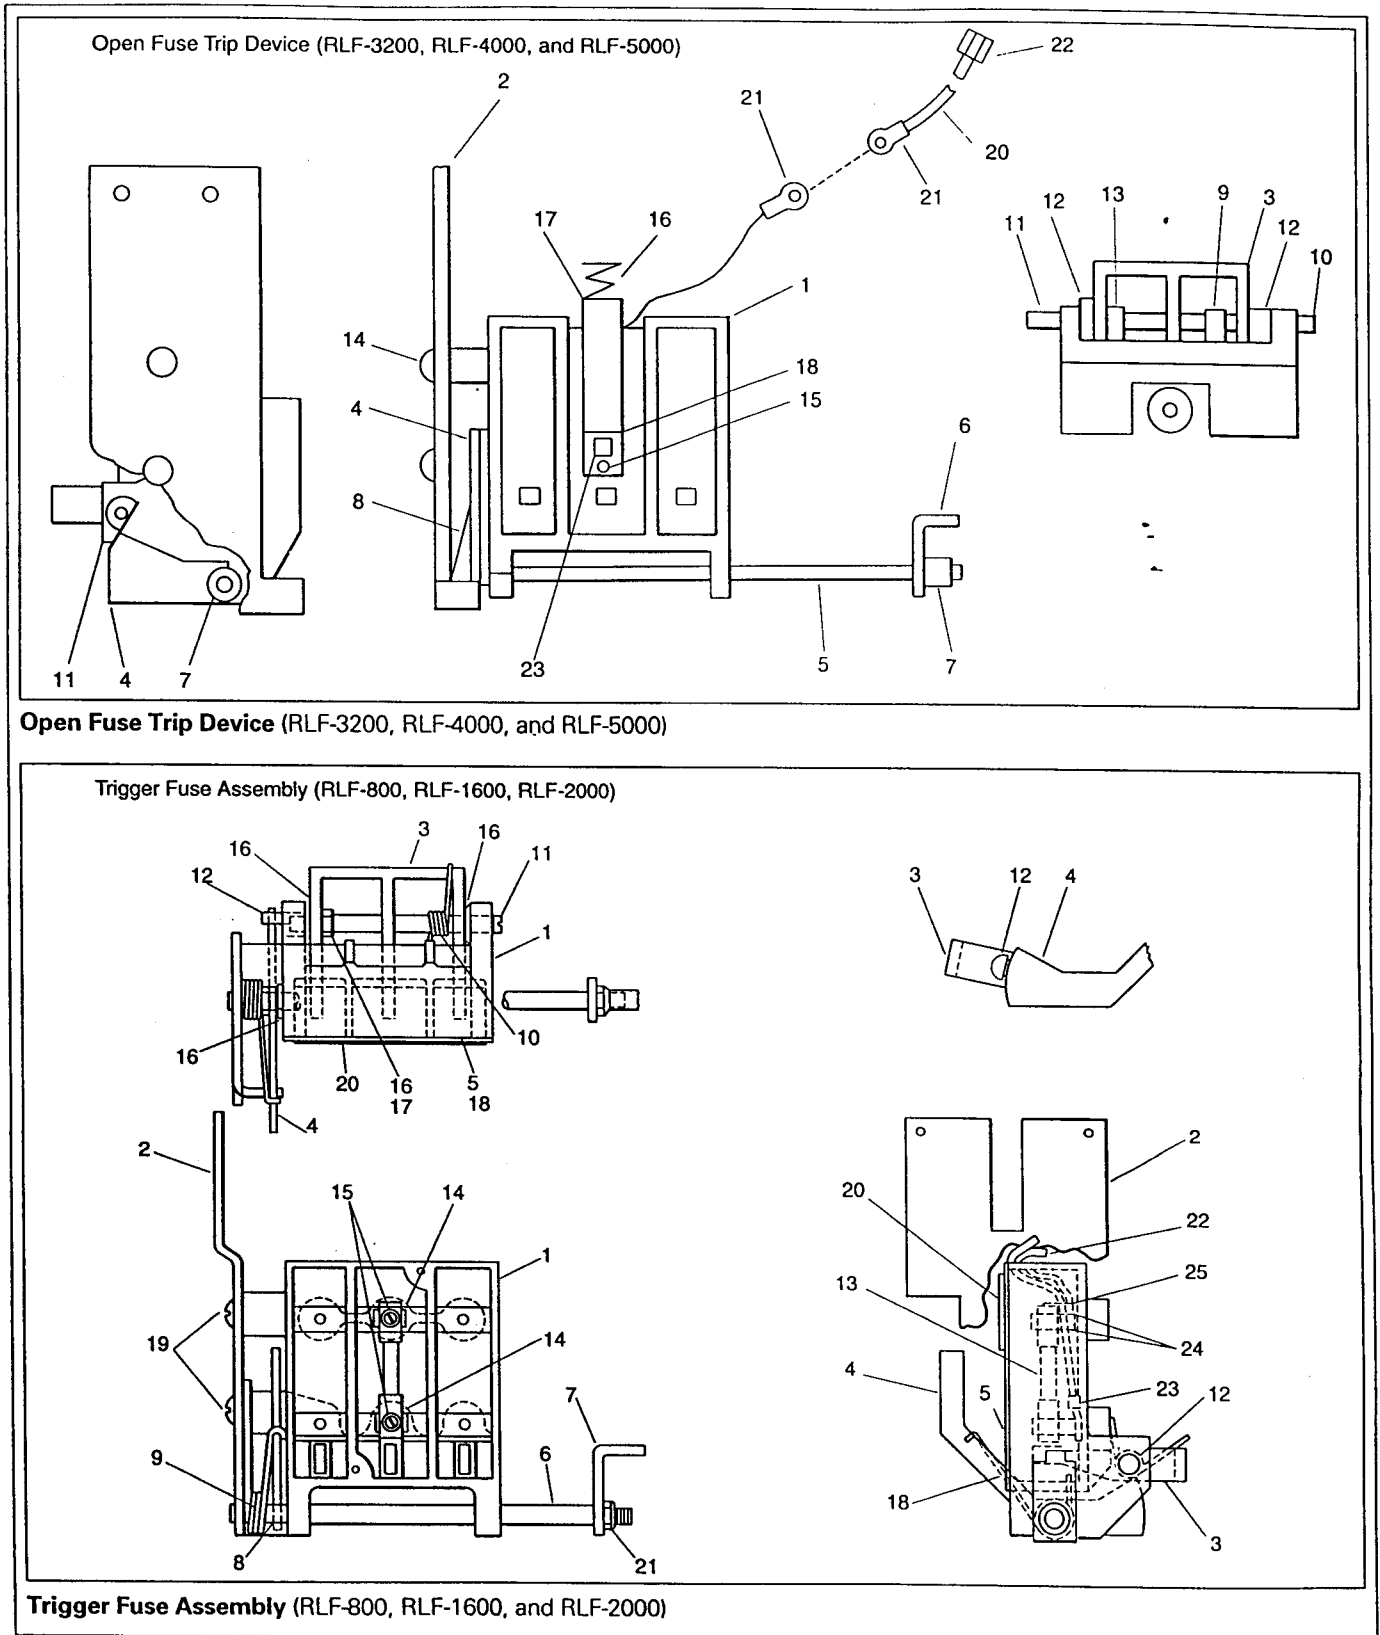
Open Fuse Trip Device Views and Trigger Fuse Assembly Views
